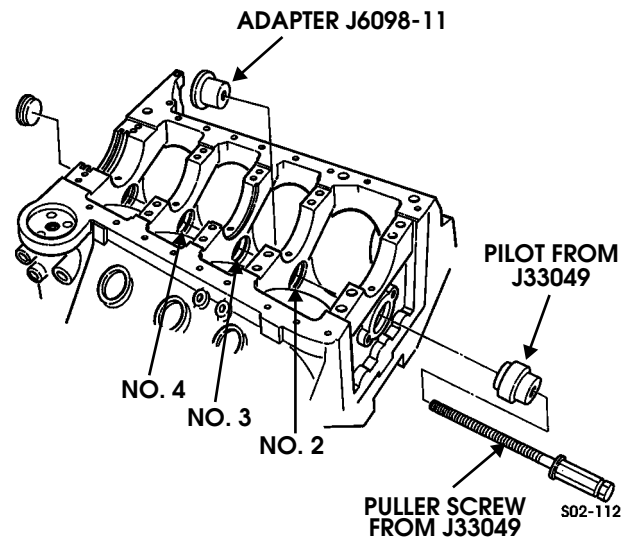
Removing Cam Bearings 2, 3, and 4
